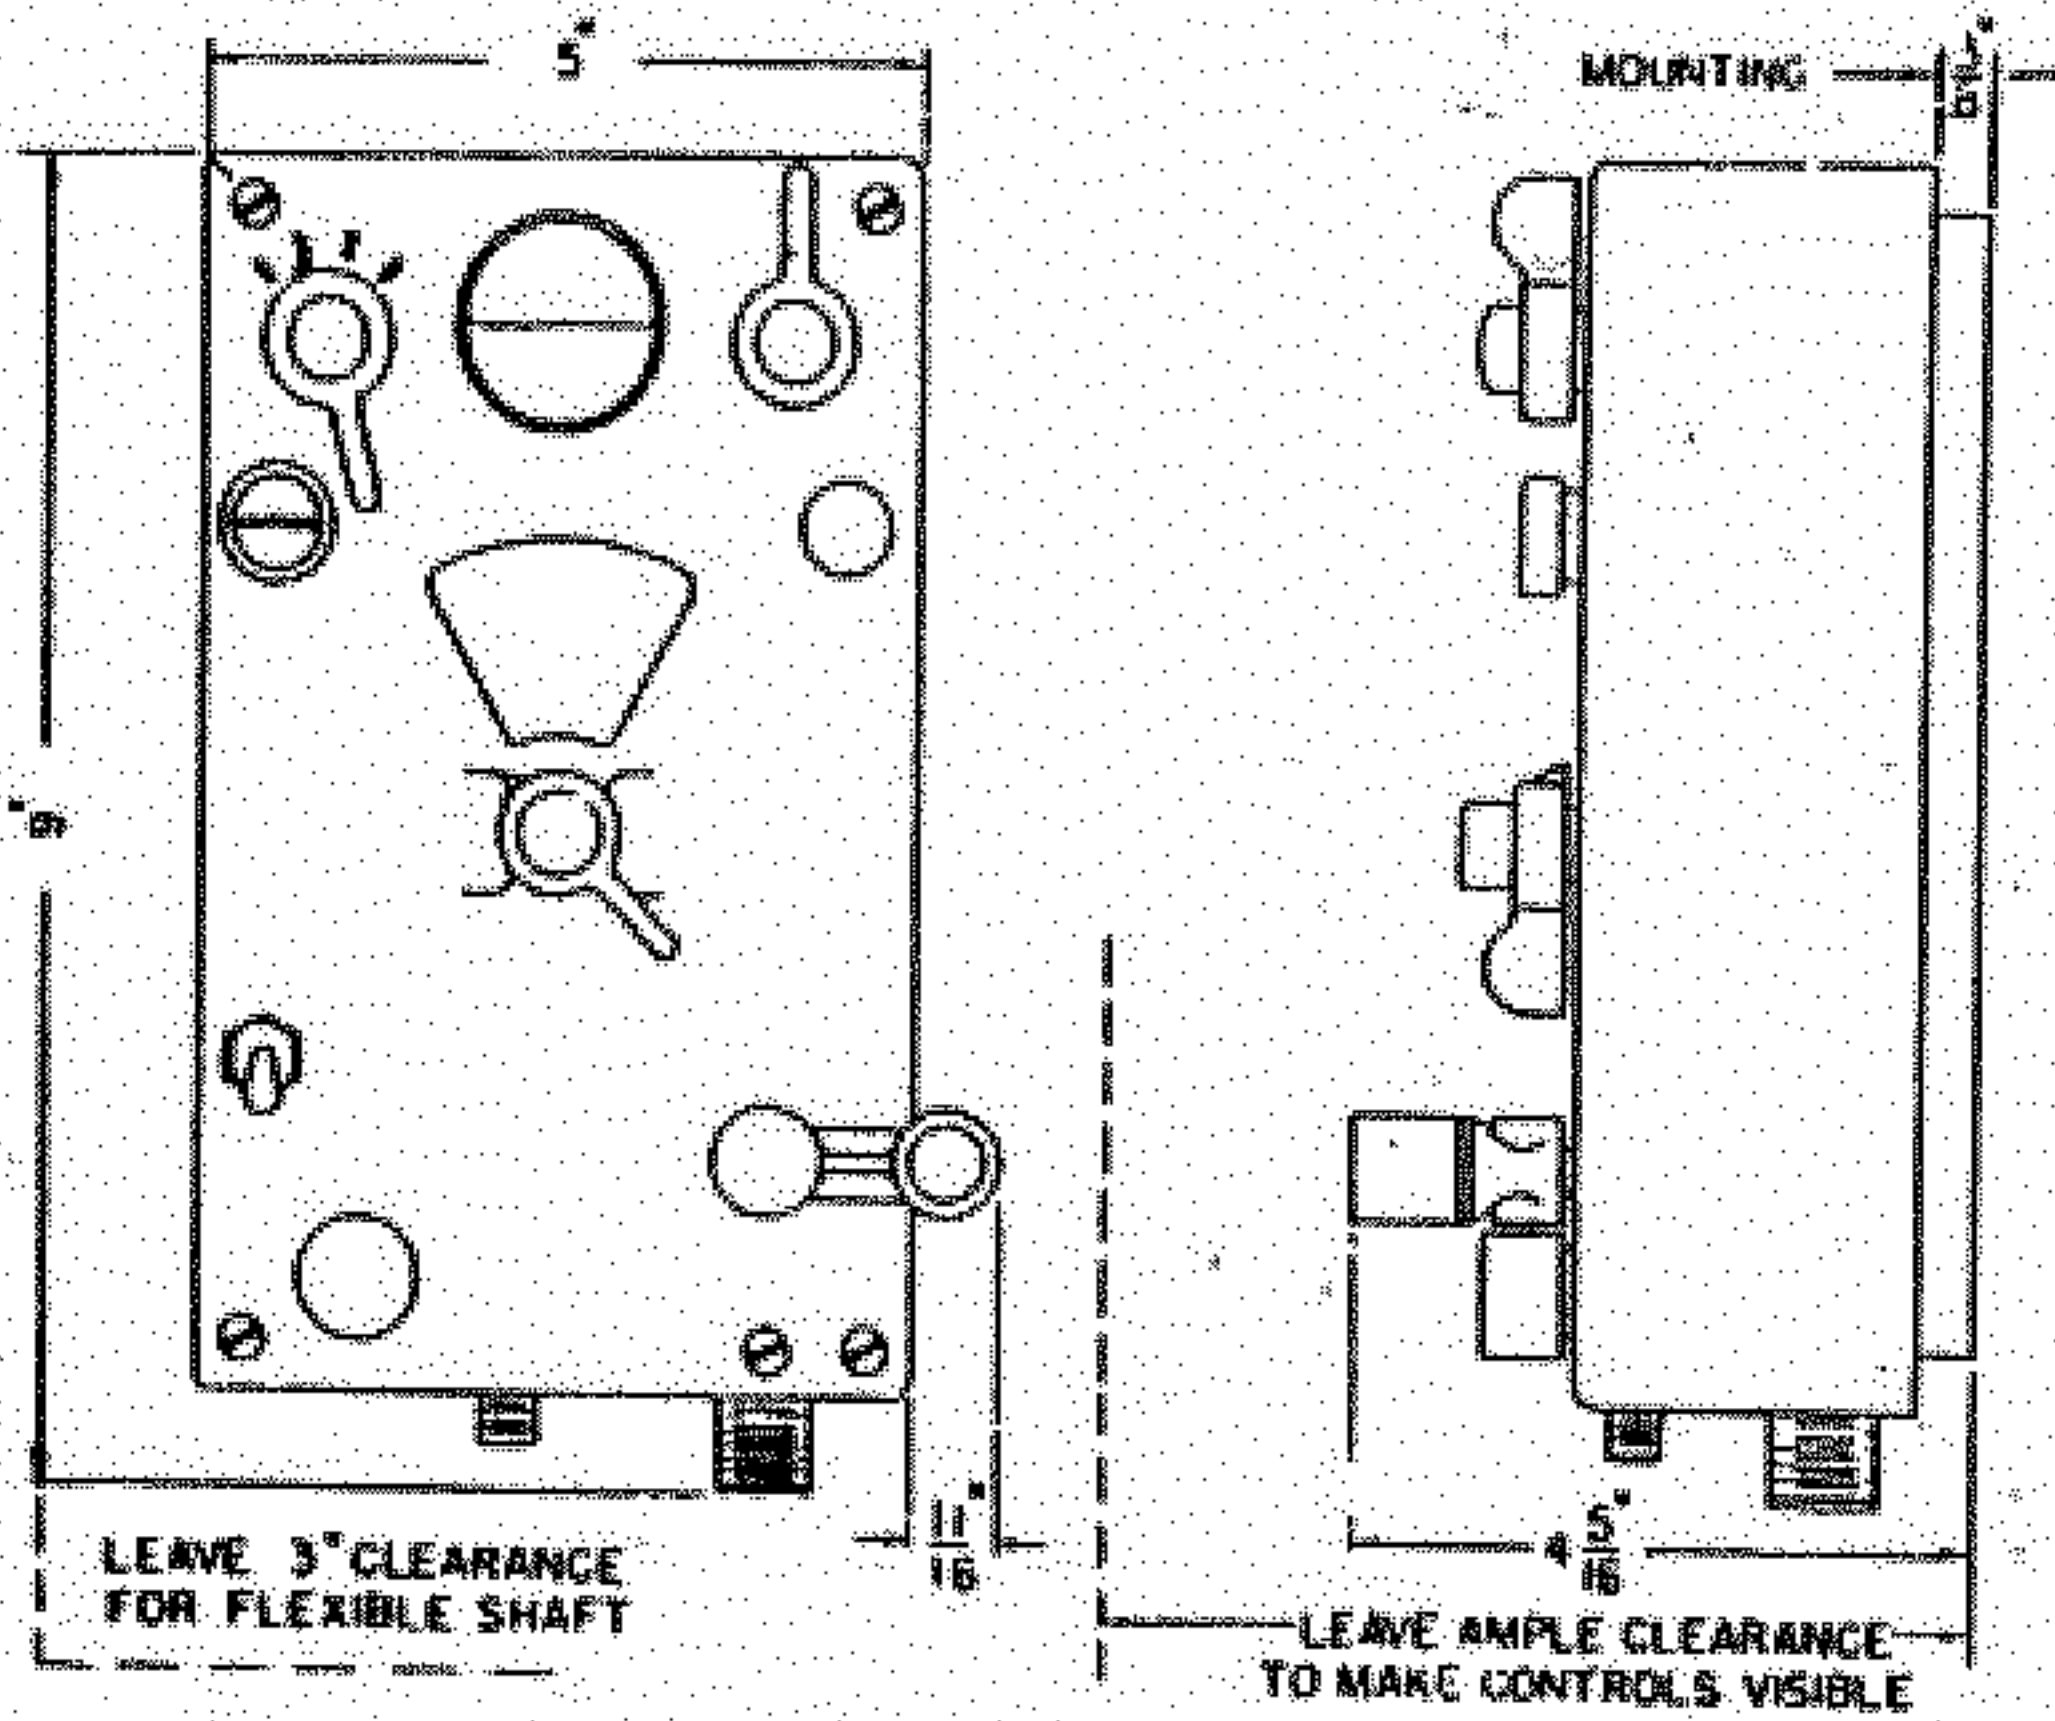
Control Box C-149/ARN-6 or C-149A/ARN-6, Outline Drawing
